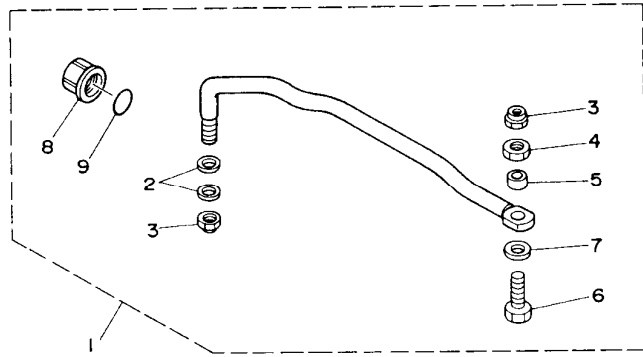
REMOTE CONTROL ATTACHMENT CONJUNTO ADITAMENTO
